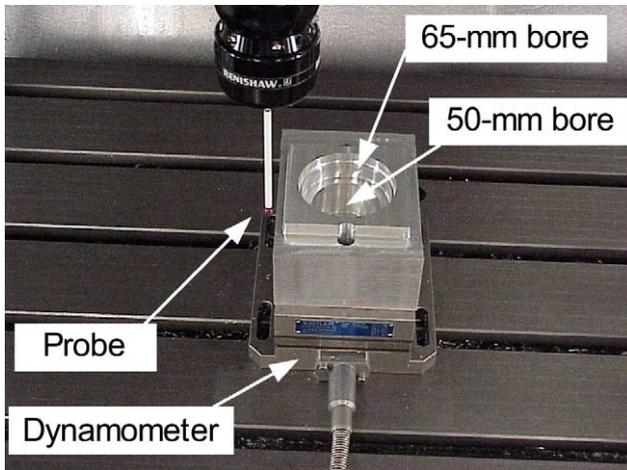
Spindle touch probe moving to inspect a finished aluminum block mounted on the force dynamometer.
